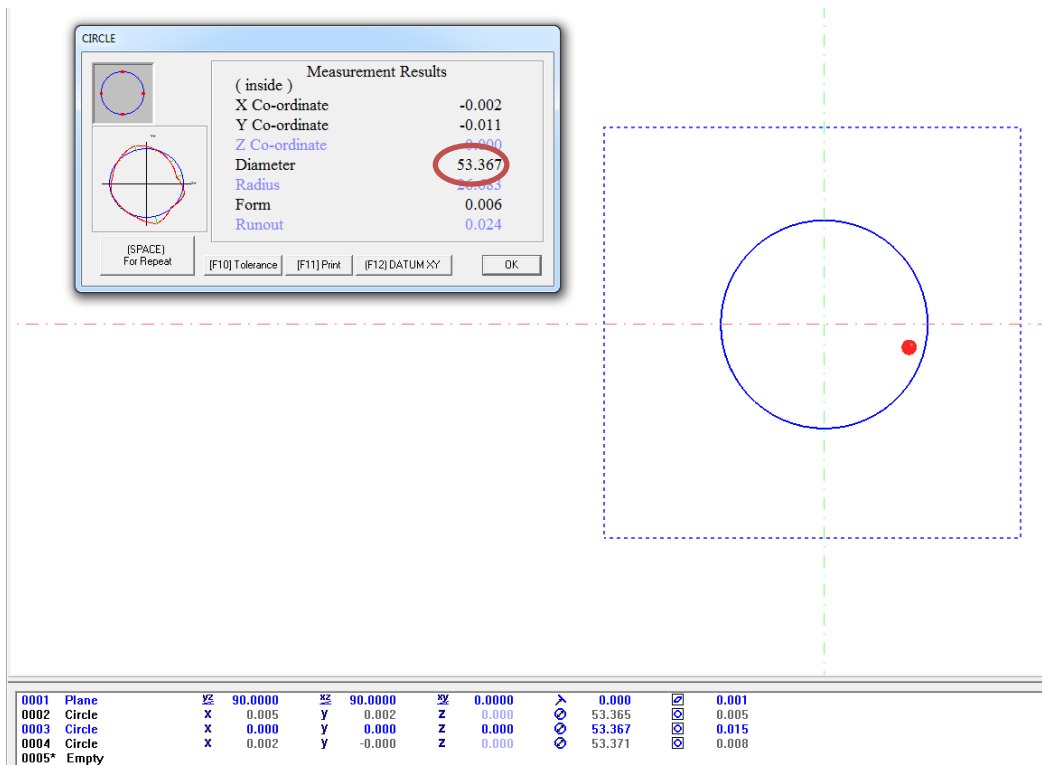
CMM Results of Bore Diameter with Welded Flanges – 20mm Deep
